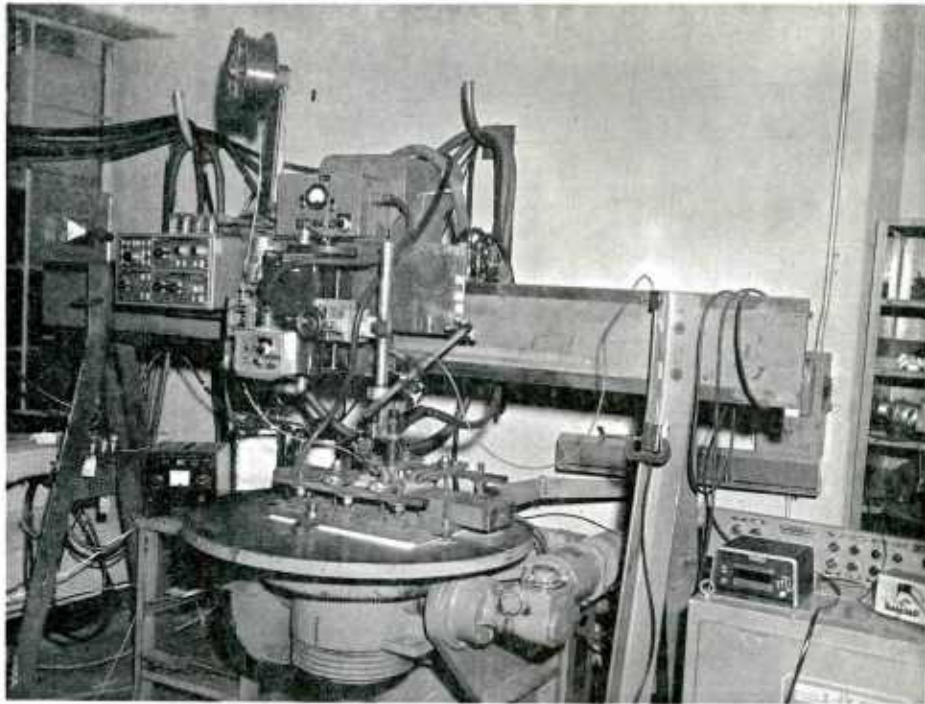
Overall view of the welding setup for weld penetration control.
